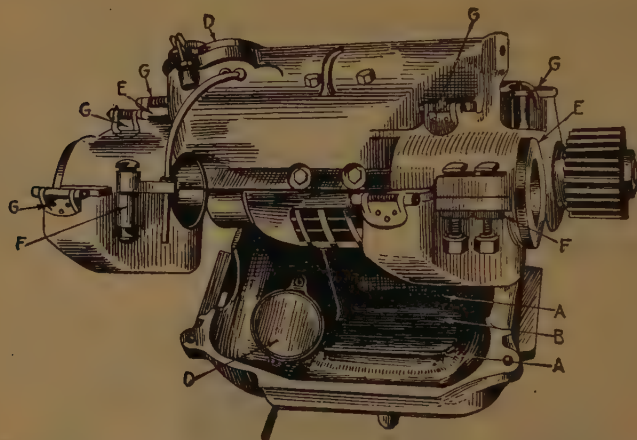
,516.—Direct current split frame motor which allows the lower part to be swung down into a pit for the inspection or renewal of the working parts. The main exciting pole pieces two of which are shown at AA, are bolted to the frame at an angle of 45 degrees to the horizontal. The commutating pole pieces one of which is shown at B, are bolted to the frame at points midway between the main exciting poles. Commutator doors DD, fitted with malleable iron covers and gaskets are provided at both ends of the motor to permit of the inspection or ventilation of the working parts under service conditions. They are inclined at any angle so as to allow of the brush holders being readily reached either from under the car, or through a trap door in the floor of the car. The covers for these openings are held in place by a readily adjustable cone locking device. Supporting brackets EE for the armature shaft, and brackets FF for the axle bearings are located on the outside top magnet frame. The linings are held rigidly in the supporting brackets by means of caps bolted tightly against them. The armature shaft linings consist of bronze sleeves soldered in place. The layer of babbit metal is so thin that the armature will not rub against the pole pieces in case it is melted out by overheating. All bearings are designed for oil and waste lubrication in a manner similar to the standard box journal bearing. The oil wells are reached through large hand holes protected by strong springs, as shown. Waste oil from the armature shaft bearings is prevented entering the inside of motor casing or frame by deflectors which divert the oil into grooves which conduct it away. The main field coils and the commutating coils are of the type and are wound with either copper wire or strip as may be necessary. The strip is insulated between turns with asbestos and the sections are separated from each other by an insulating partition of oiled asbestos and mica. All coils, whether of wire or strip are first provided with a wrapping of cotton tape and are thoroughly filled with an insulating compound by the vacuum process. They are then thoroughly insulated with several wrappings of specially prepared tape, and finally given a wrapping of heavy cotton webbing thoroughly filled with japan to protect them against mechanical injury. The coils are securely clamped to the frame when the pole pieces are bolted in. The armature core is built up of laminations of soft iron interspaced with ventilating ducts. The armature coils are of the formed type, and the windings at both ends are covered with a strong canvas dressing securely bound in place. The commutator segments are made of hard drawn copper insulated throughout with mica. The cone micas are built up and pressed hard and compact in steam moulds. The mica between the segments is made of softer quality, so that it will wear evenly with the copper. The shells and caps are of cast steel or malleable iron in strong sections which serve to prevent breakage and preserve the proper shape of the commutator. The brush holders, two in number, are made of cast bronze and hold from two to four carbon brushes each, according to the size of the motor. The brushes slide in finished ways, and are pressed against the commutator by
